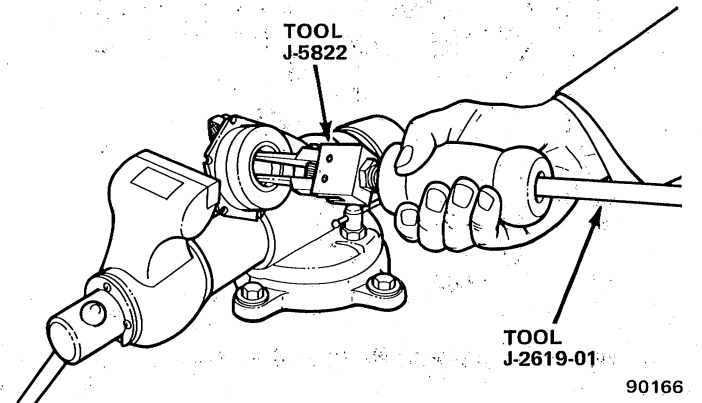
K-9 Removing Wormshaft Lower Bearing Cup
